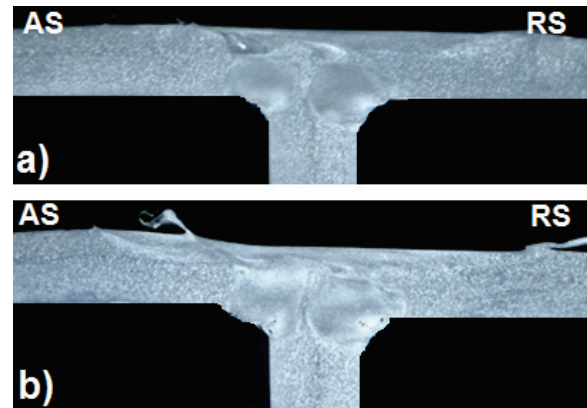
Macroscopic views of section of second FSW T-joint, sample taken at 4cm from the a) beginning of weld metal and b) end of weld metal
